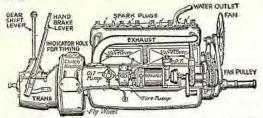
Six-cylinder unit power plant, valve side. Cylinders of the "L" type. Thus the valves are all on one side.
